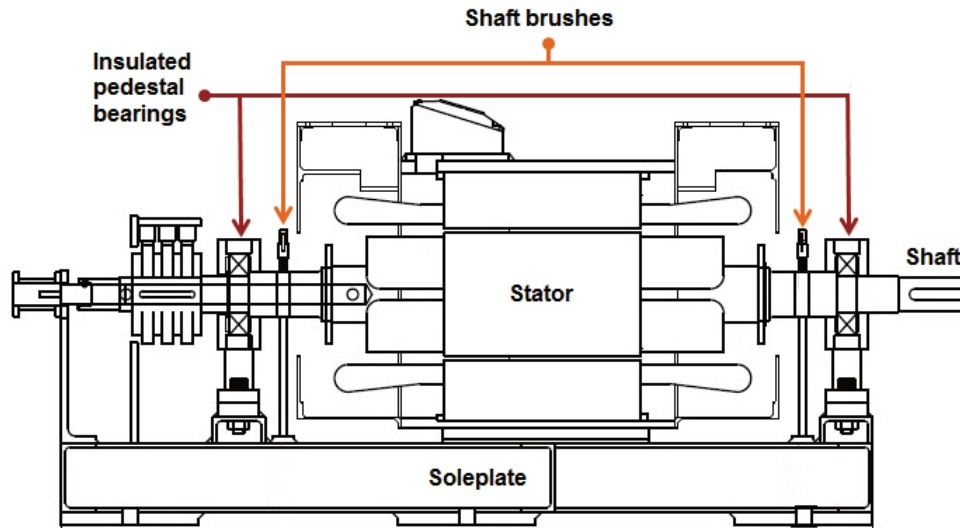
Cross-sectional side view of 2-pole synchronous generator, illustrating physical location of shaft brushes used for measurement
